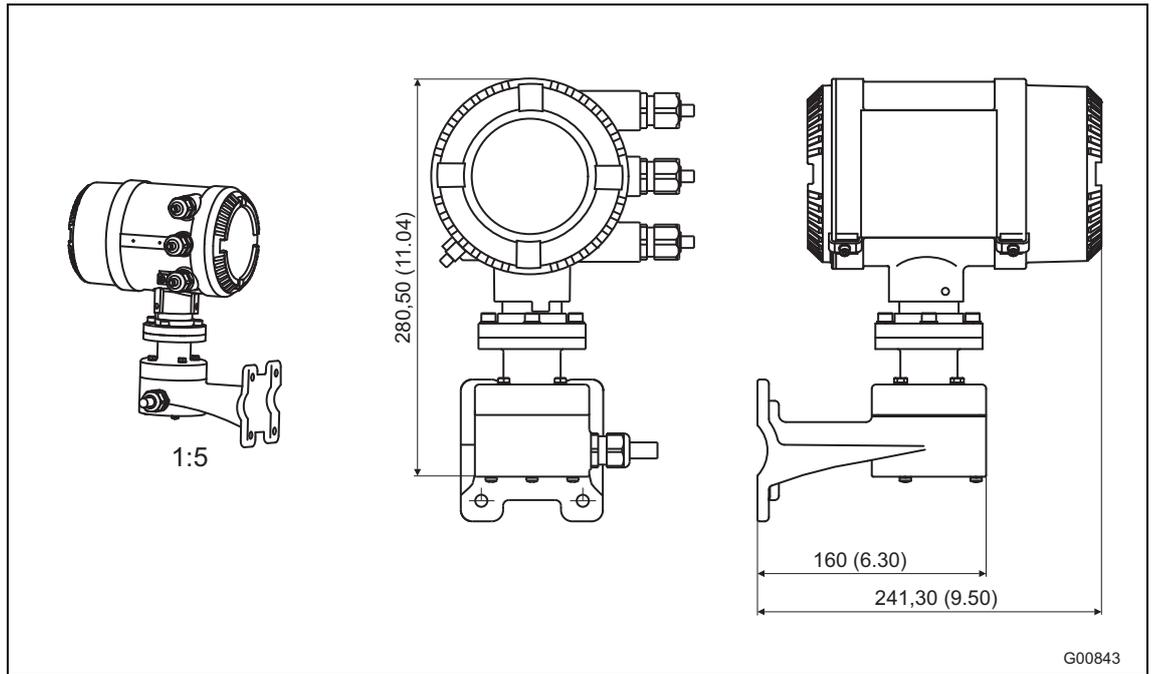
Dimensions of ME26/27/28 transmitter housing
